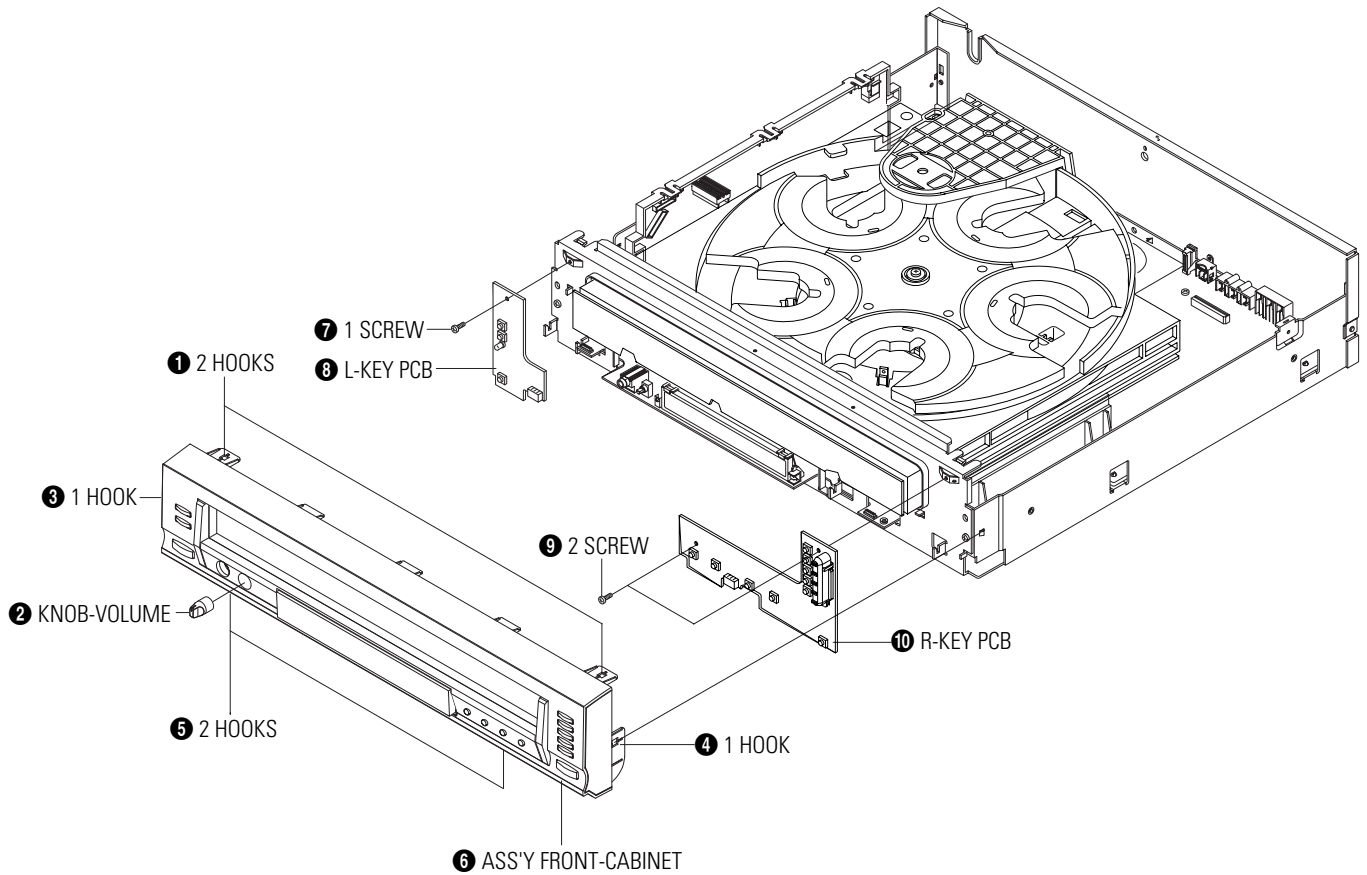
Ass'y Front-Cabinet, Key PCB Removal
